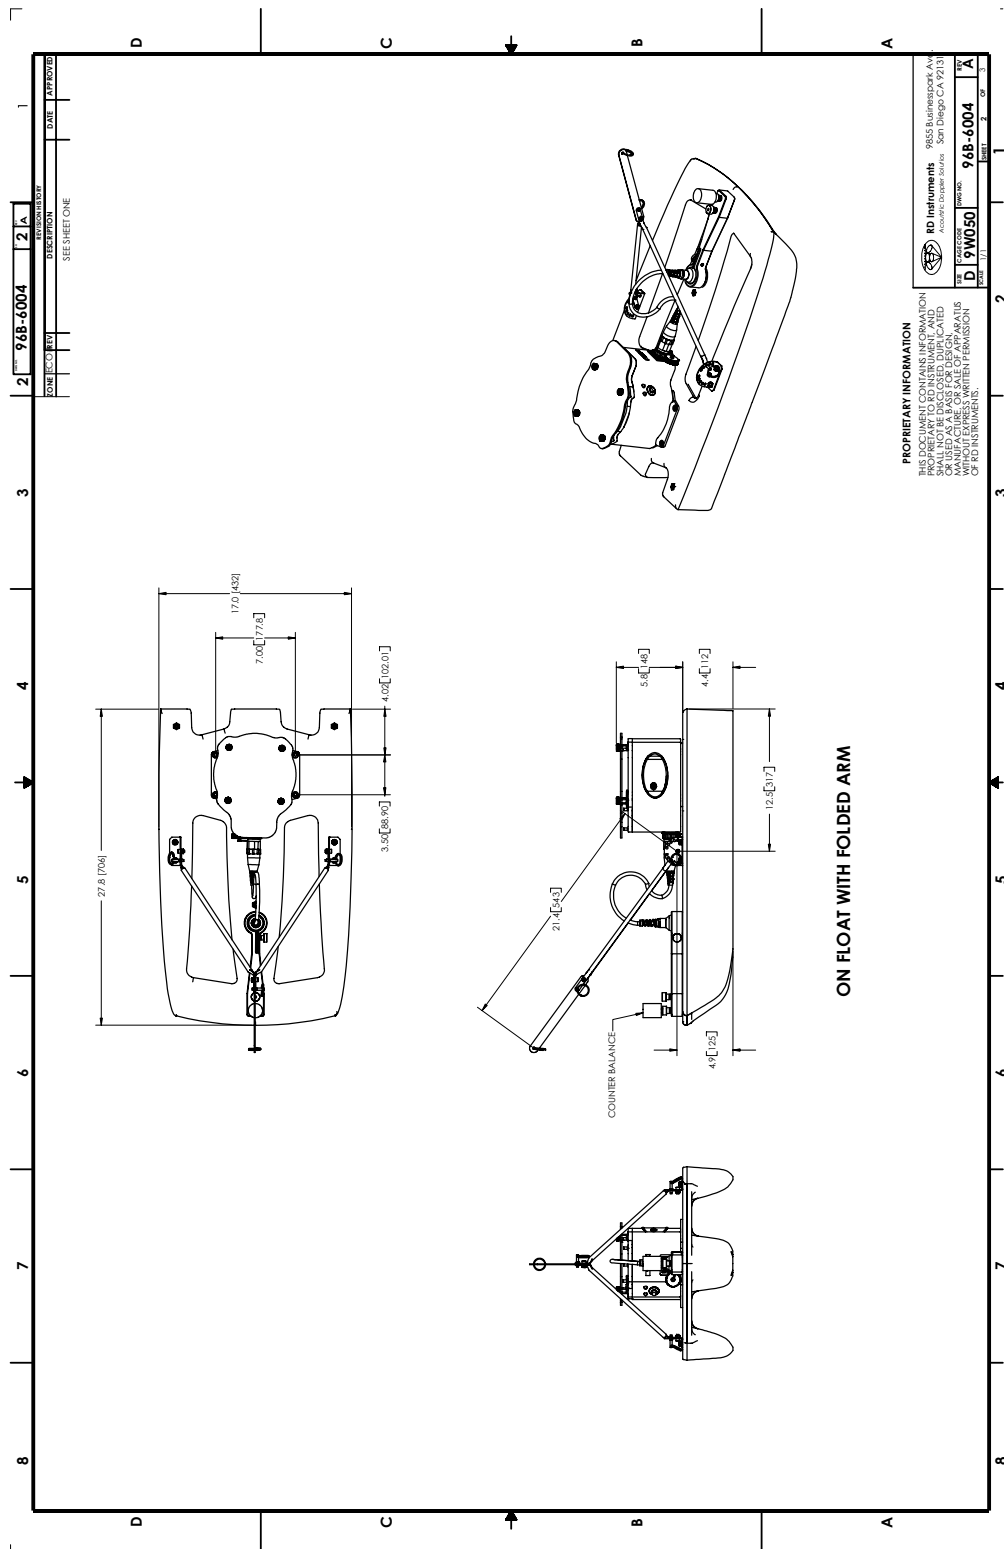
Outline Installation Drawing – Sheet 2 of 3
